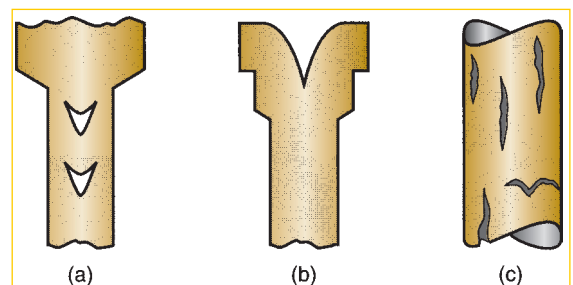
Some common defects in extrusion: (a) centerburst, (b) piping, and (c) surface cracking.
